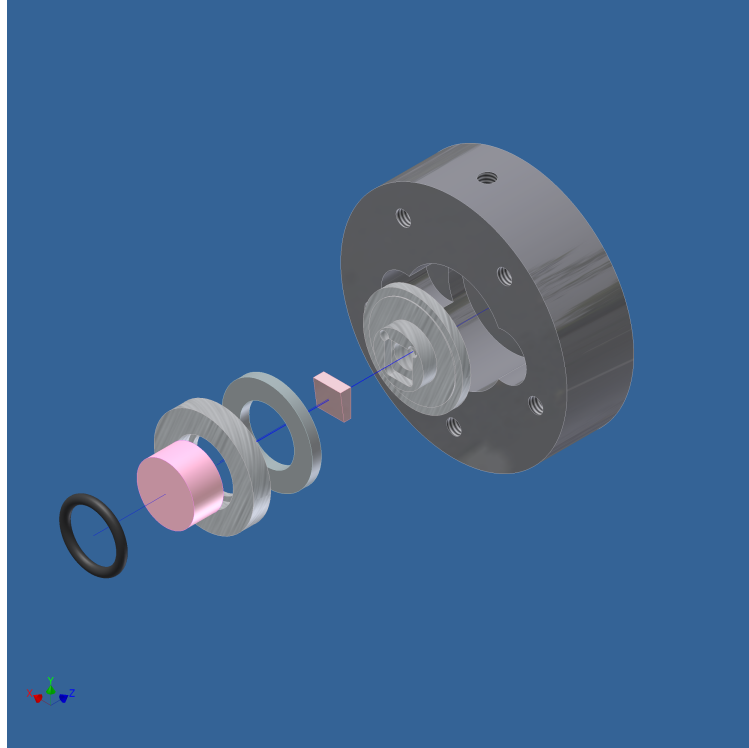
An explosion of the laser cavity design drawn using Autodesk Inventor[®]. The end cap which bolts onto the main housing has been left out for clarity. The two optics are represented in pink and the o-ring is black. The components are from left to right: o-ring, 25 mm radius of curvature substrate with custom coatings, aluminium holder, PZT, erbium wedge, aluminium holder, aluminium casing.
